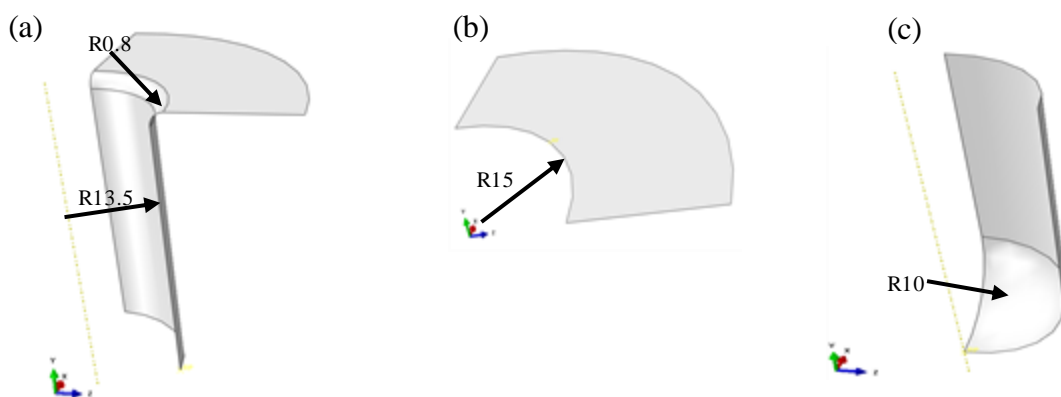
Shell quarter model (a) die surface, (b) holder surface, and (c) punch surface are discrete rigid parts (all dimensions in mm).
